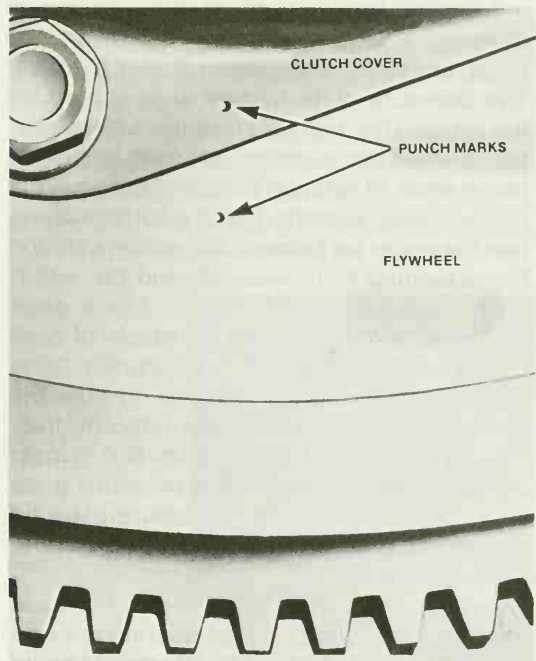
The clutch cover and flywheel should be punch-marked as a reference in reassembly. (Chrysler Corporation)
